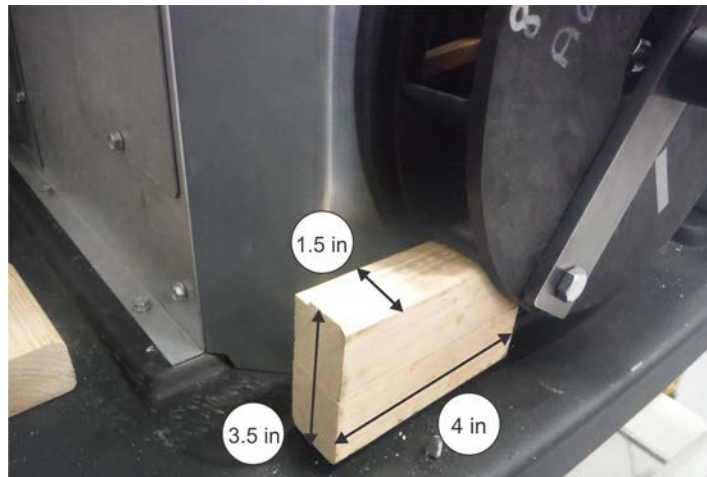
BLOCKING THE ALTERNATOR FOR REMOVAL
